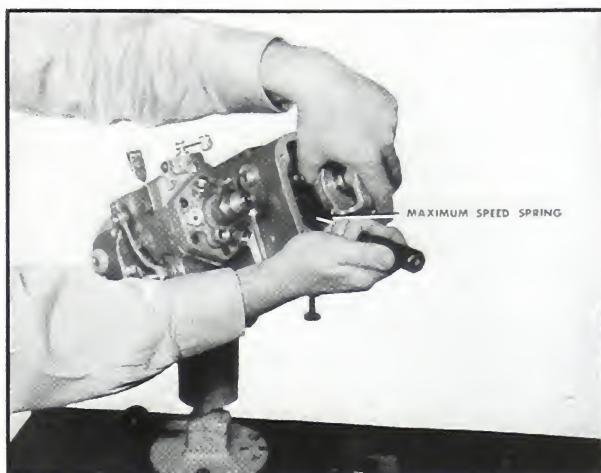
Check maximum-speed spring for drag the fuel pump test stand.
